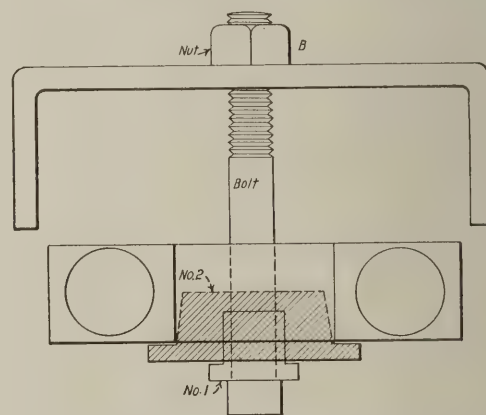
Puller Applied to Large Bearing Showing Both Washers in Use
